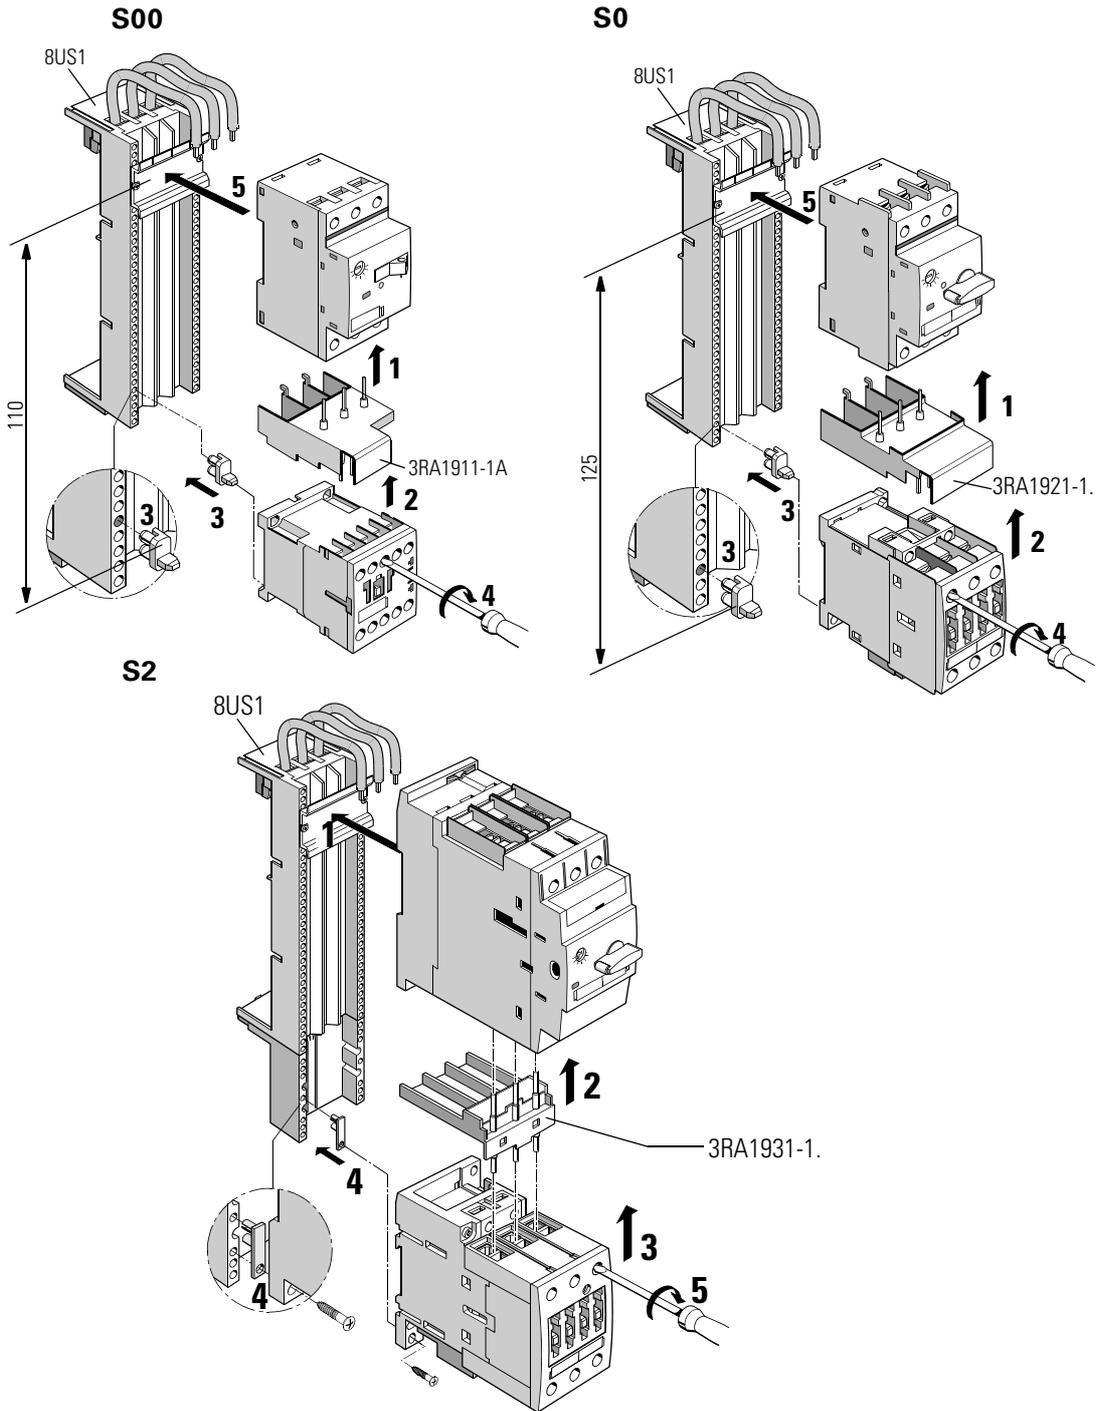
Self-assembly, busbars, direct starters (frame sizes S00 and S2)
